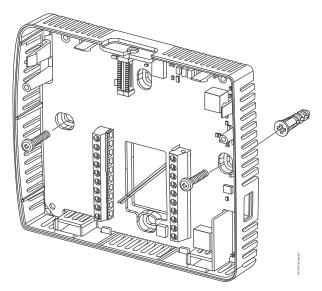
Securing the Thermostat Controller Mounting Base to the Wall
